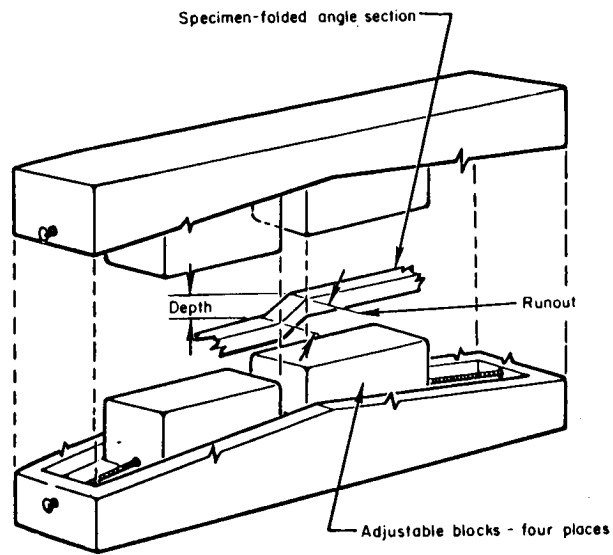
UNIVERSAL JOGGLE DIE (REF. 61)
